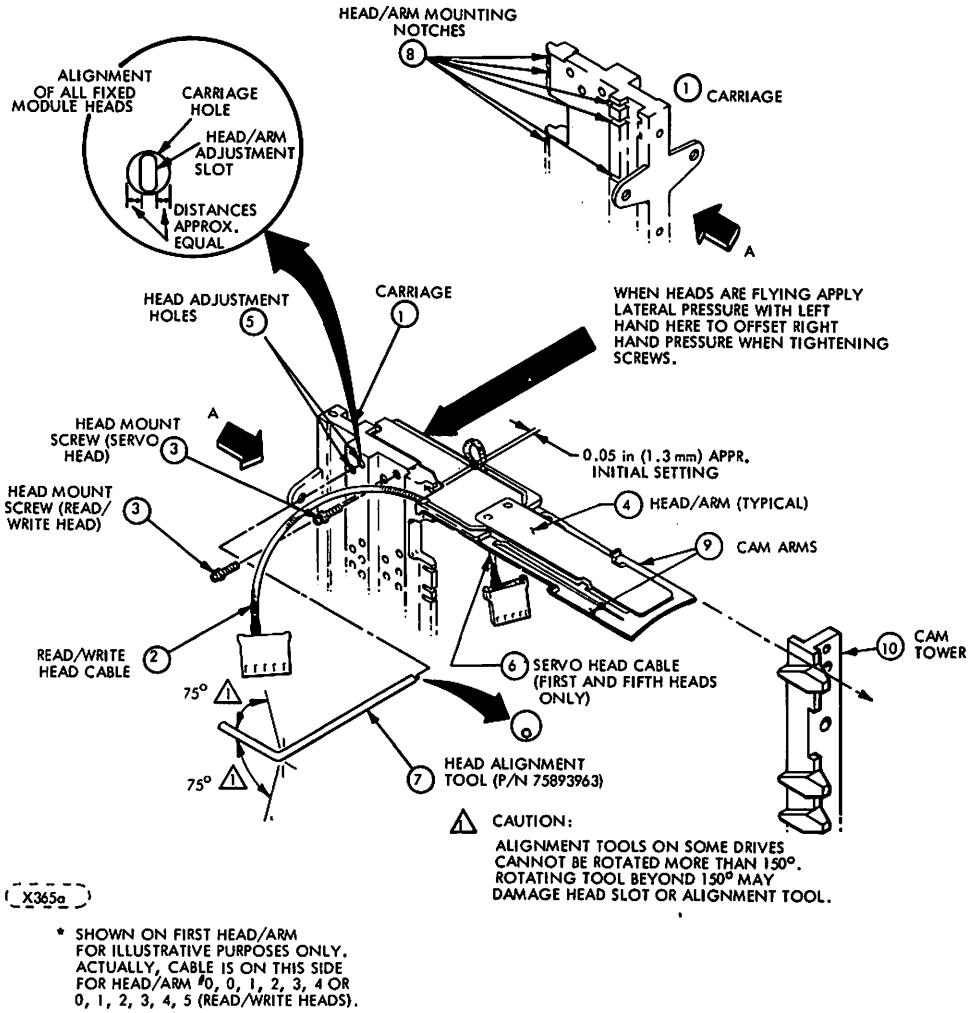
HEAD/ARM REMOVAL AND REPLACEMENT AND ALIGNMENT
